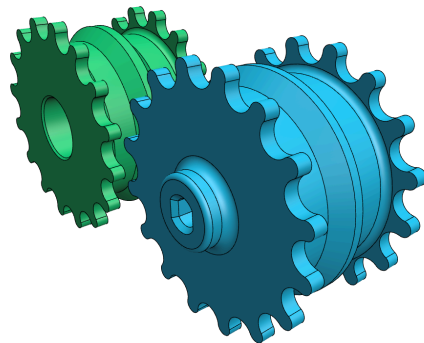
CAD design of idler sprocket (left) and drive sprocket (right)
